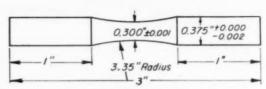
Dimensions of Specimens Used for Fatigue Tests
